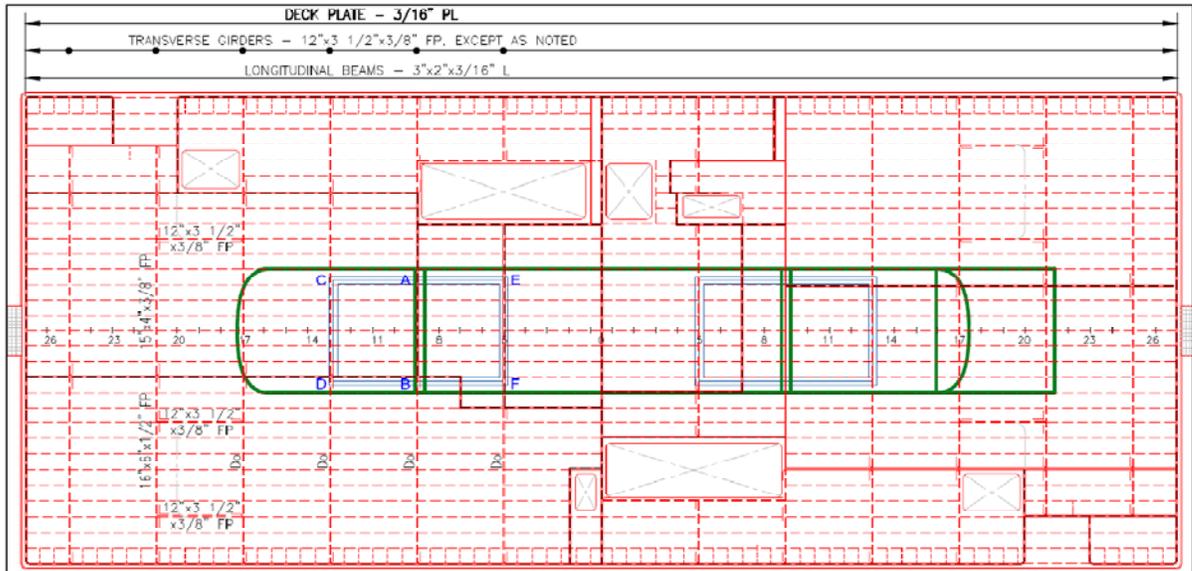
Bridge Deck Structural Arrangement of Single Tank
